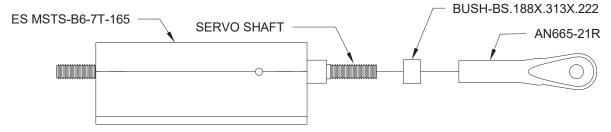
INSTALLING CLEVIS AND BUSHING
